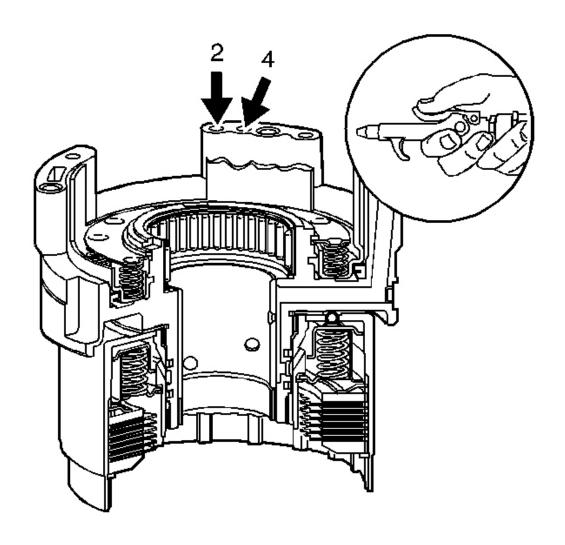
Blowing Air Into Feed Holes Courtesy of GENERAL MOTORS CORP.
